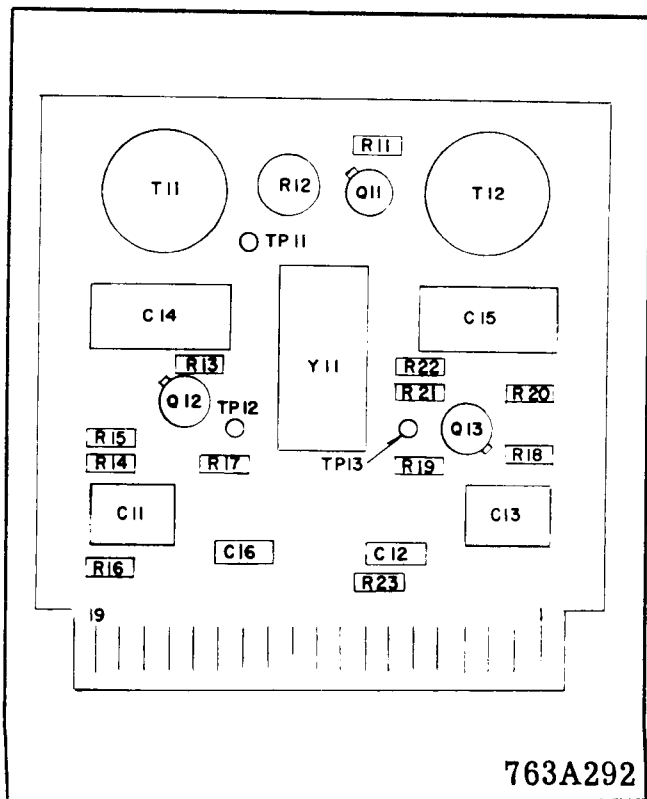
Component locations on the oscillator and mixer printed circuit board.
